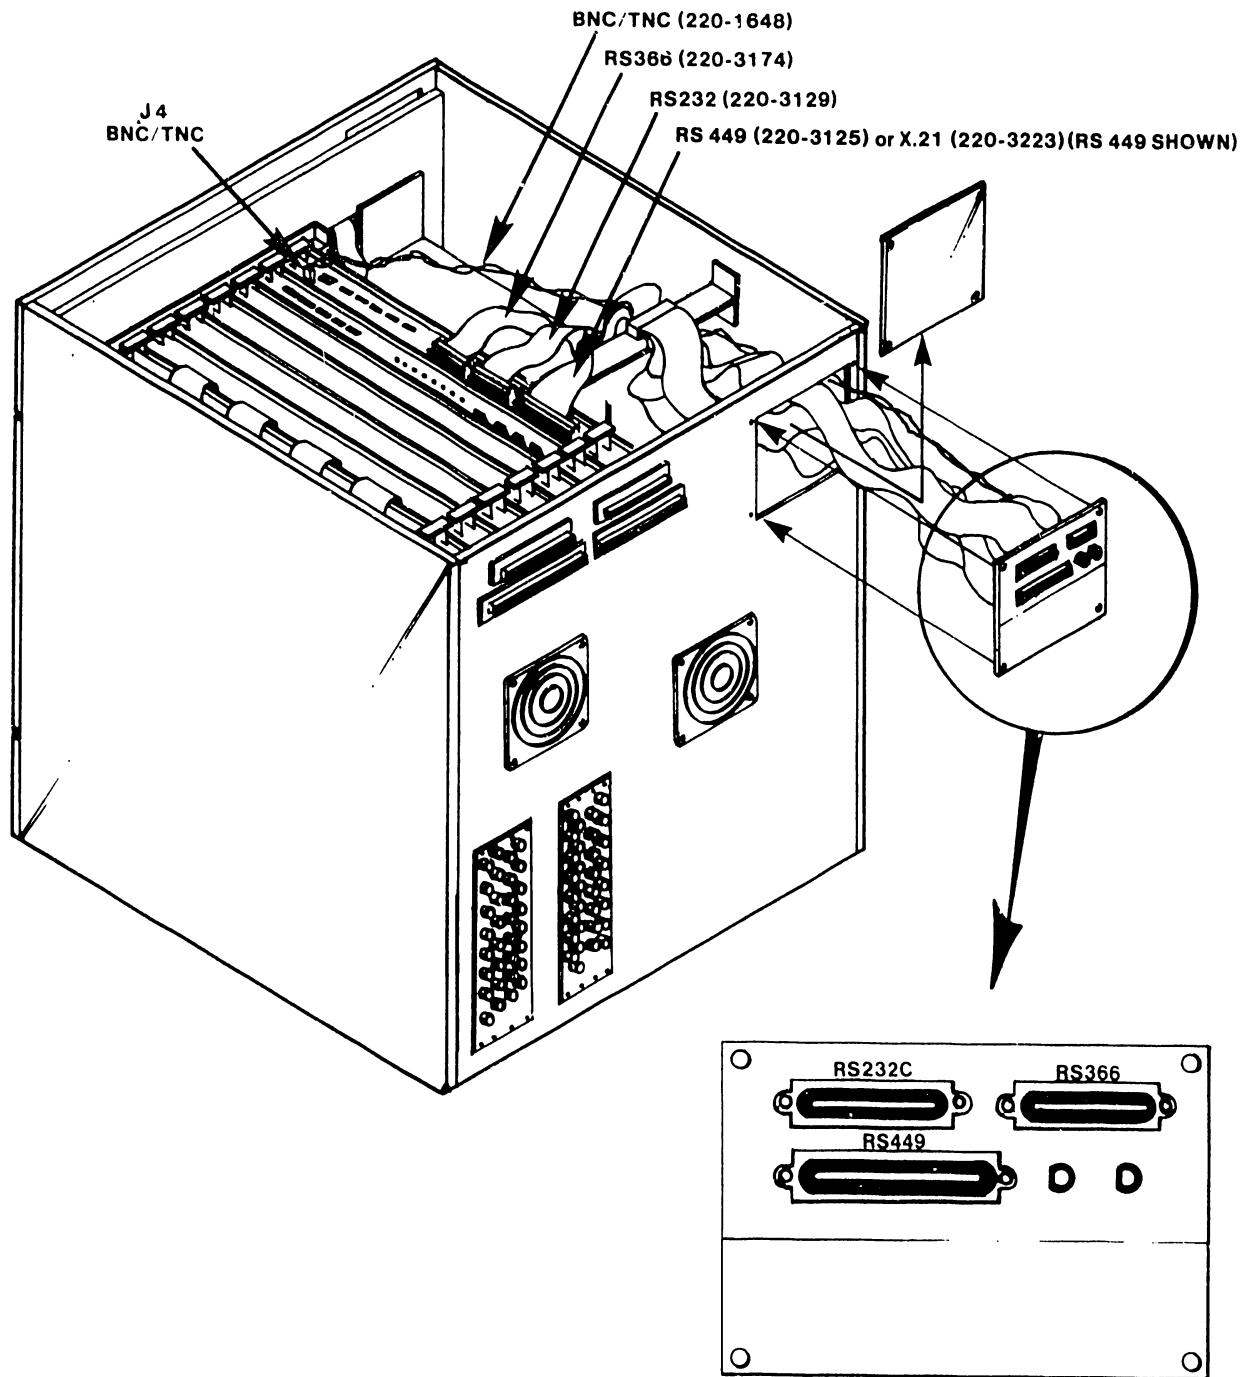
Rear Cover Plate Removal/TC Rear Panel Installation (140/145)
